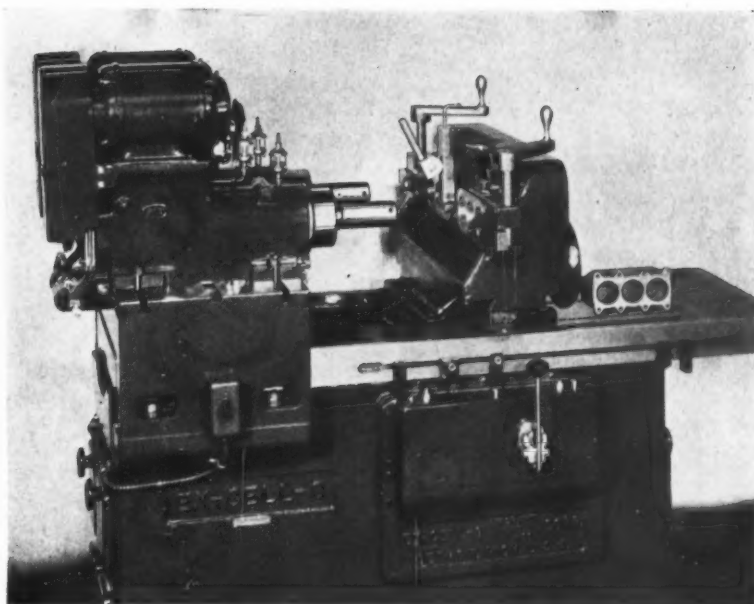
Indexing Fixtures are Provided on the Machine Shown for the Precision Boring of Cylinder Blocks
